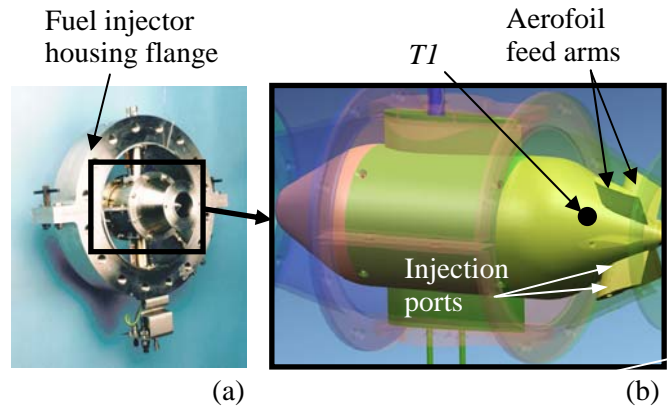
(a): Outer wall and flange of fuel injector housing; (b) Fuel injector housing (transparent view of outer wall)
